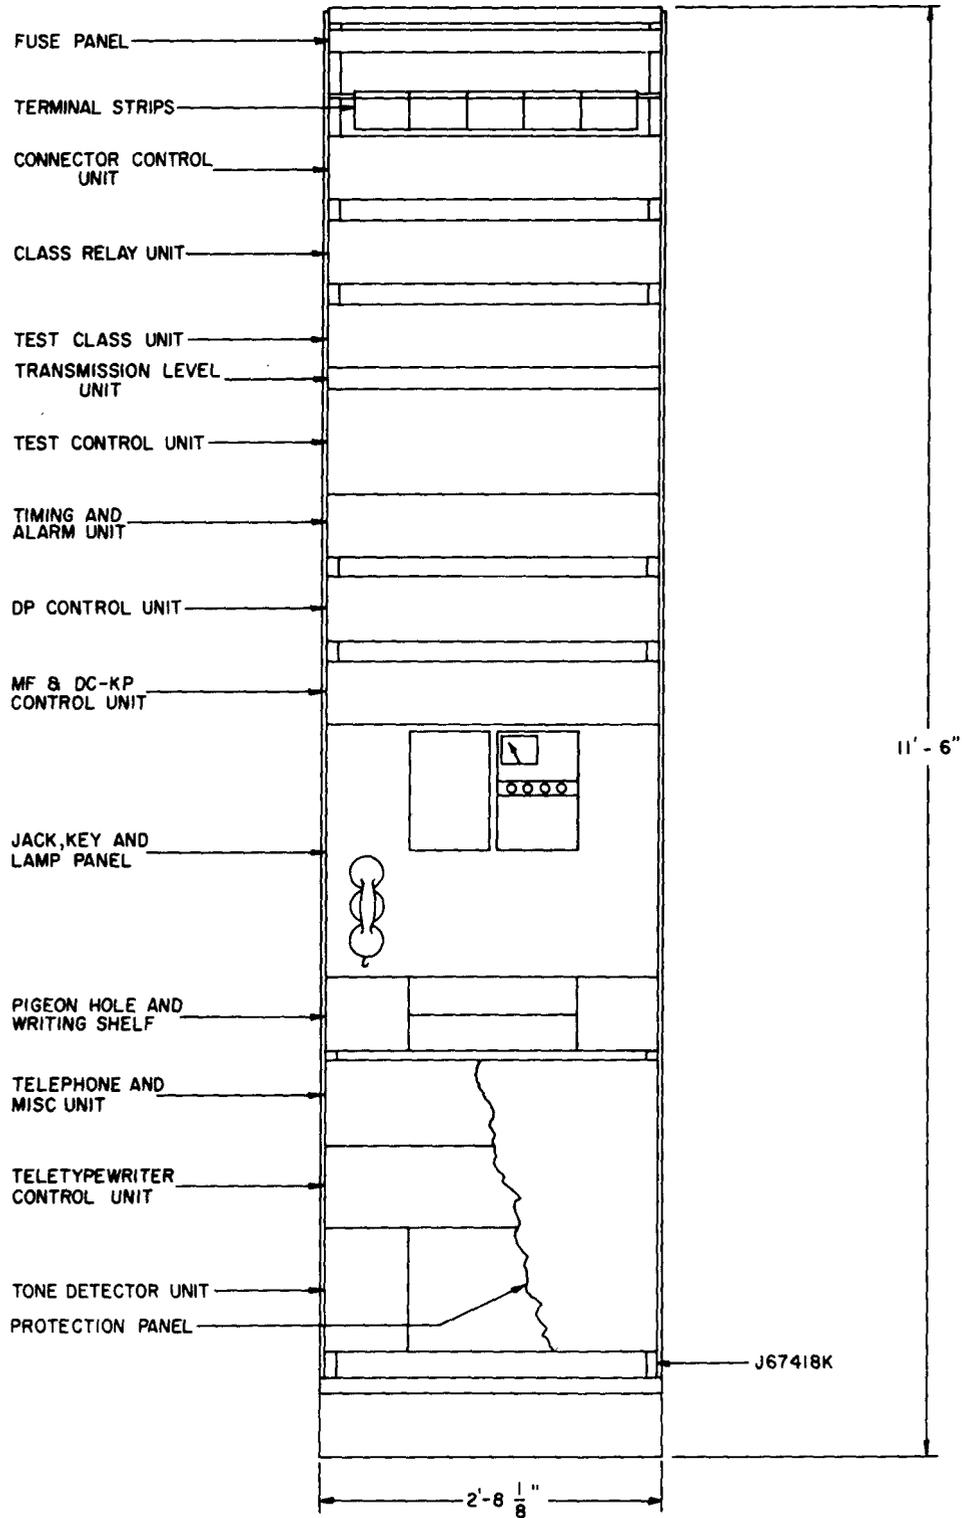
Automatic Outgoing Toll Connecting Trunk Operational Test Frame
